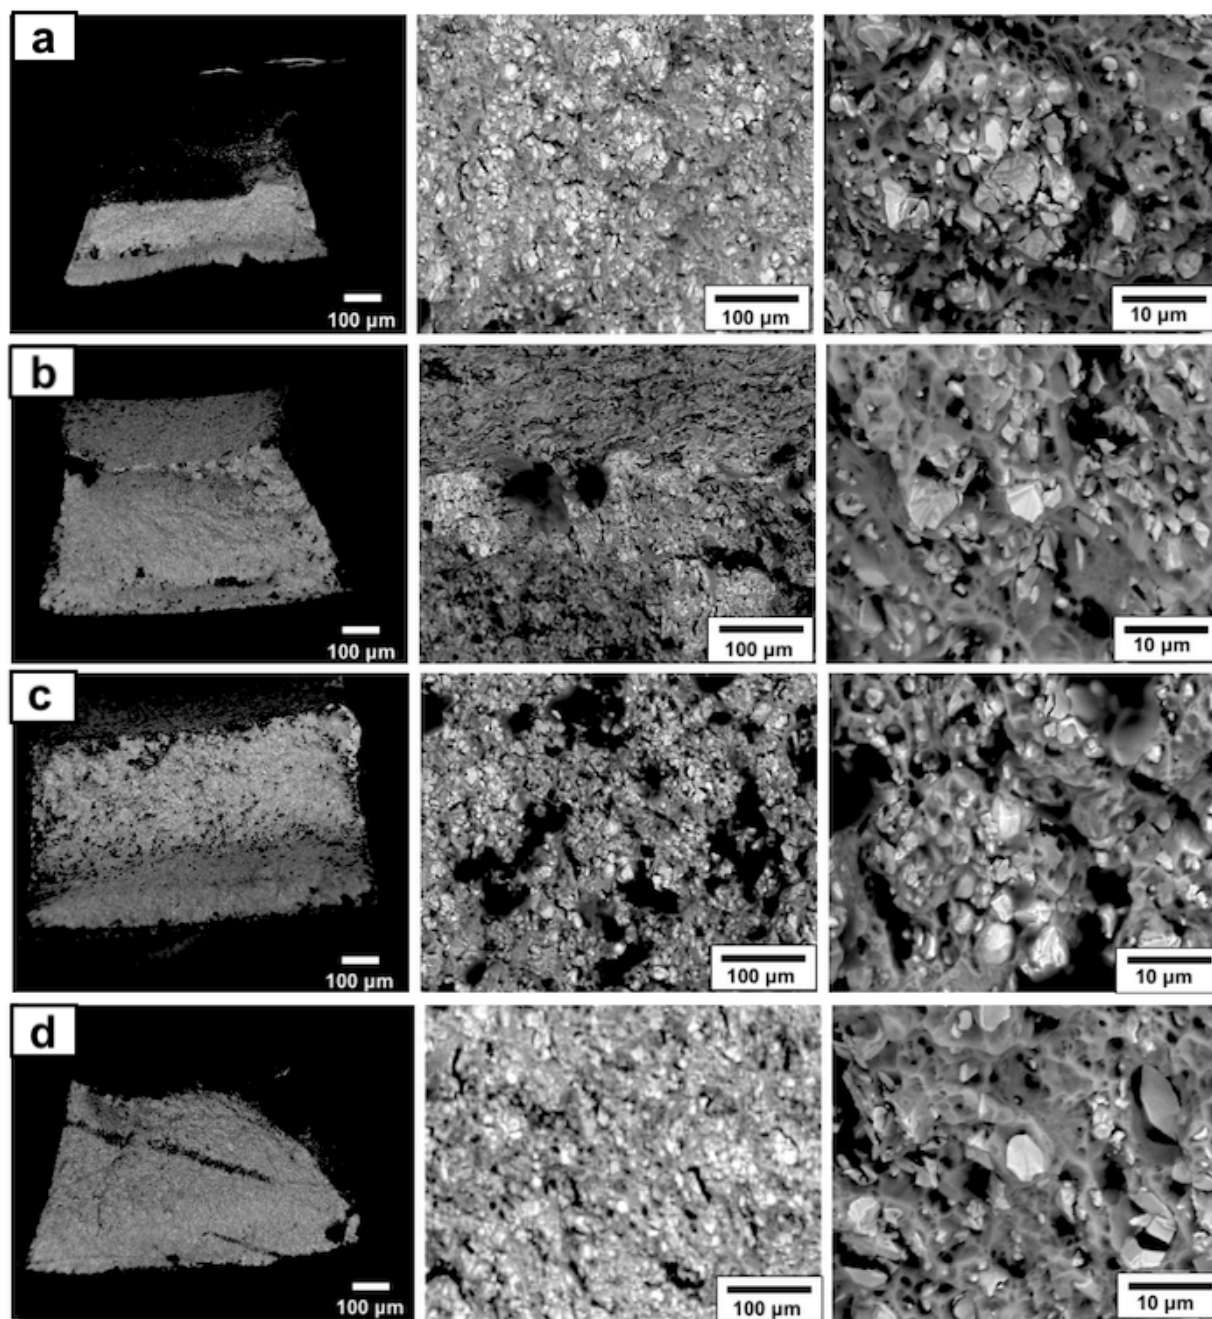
W-Ti 70/30 wt% rolled at 1000 °C SEM BSE image of fracture surfaces after 3-point bending at different temperatures. 3-point bending fracture surfaces after testing at (a) 150 °C, (b) 200 °C (c) 225 °C and (d) 250 °C of W-Ti in the as-rolled direction after aging at 1000 °C for 100h.
